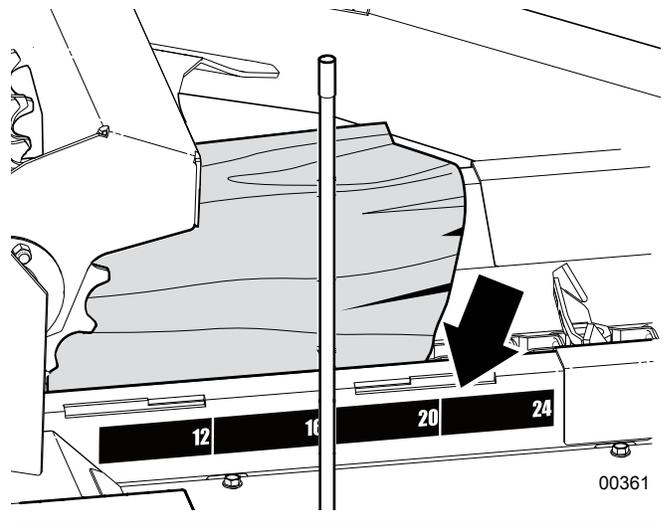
Length Guide on Operator Side of Infeed Conveyor
